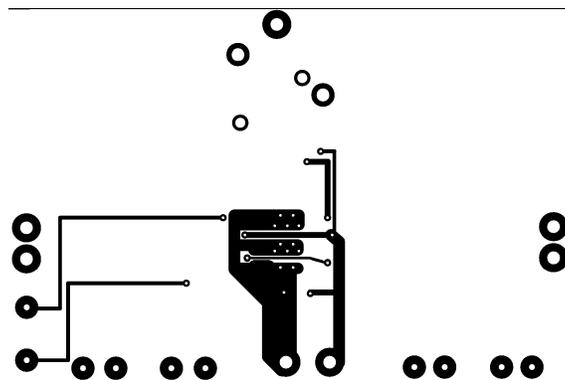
Recommended MTE PC Board Layout: Bottom-Side Layout
